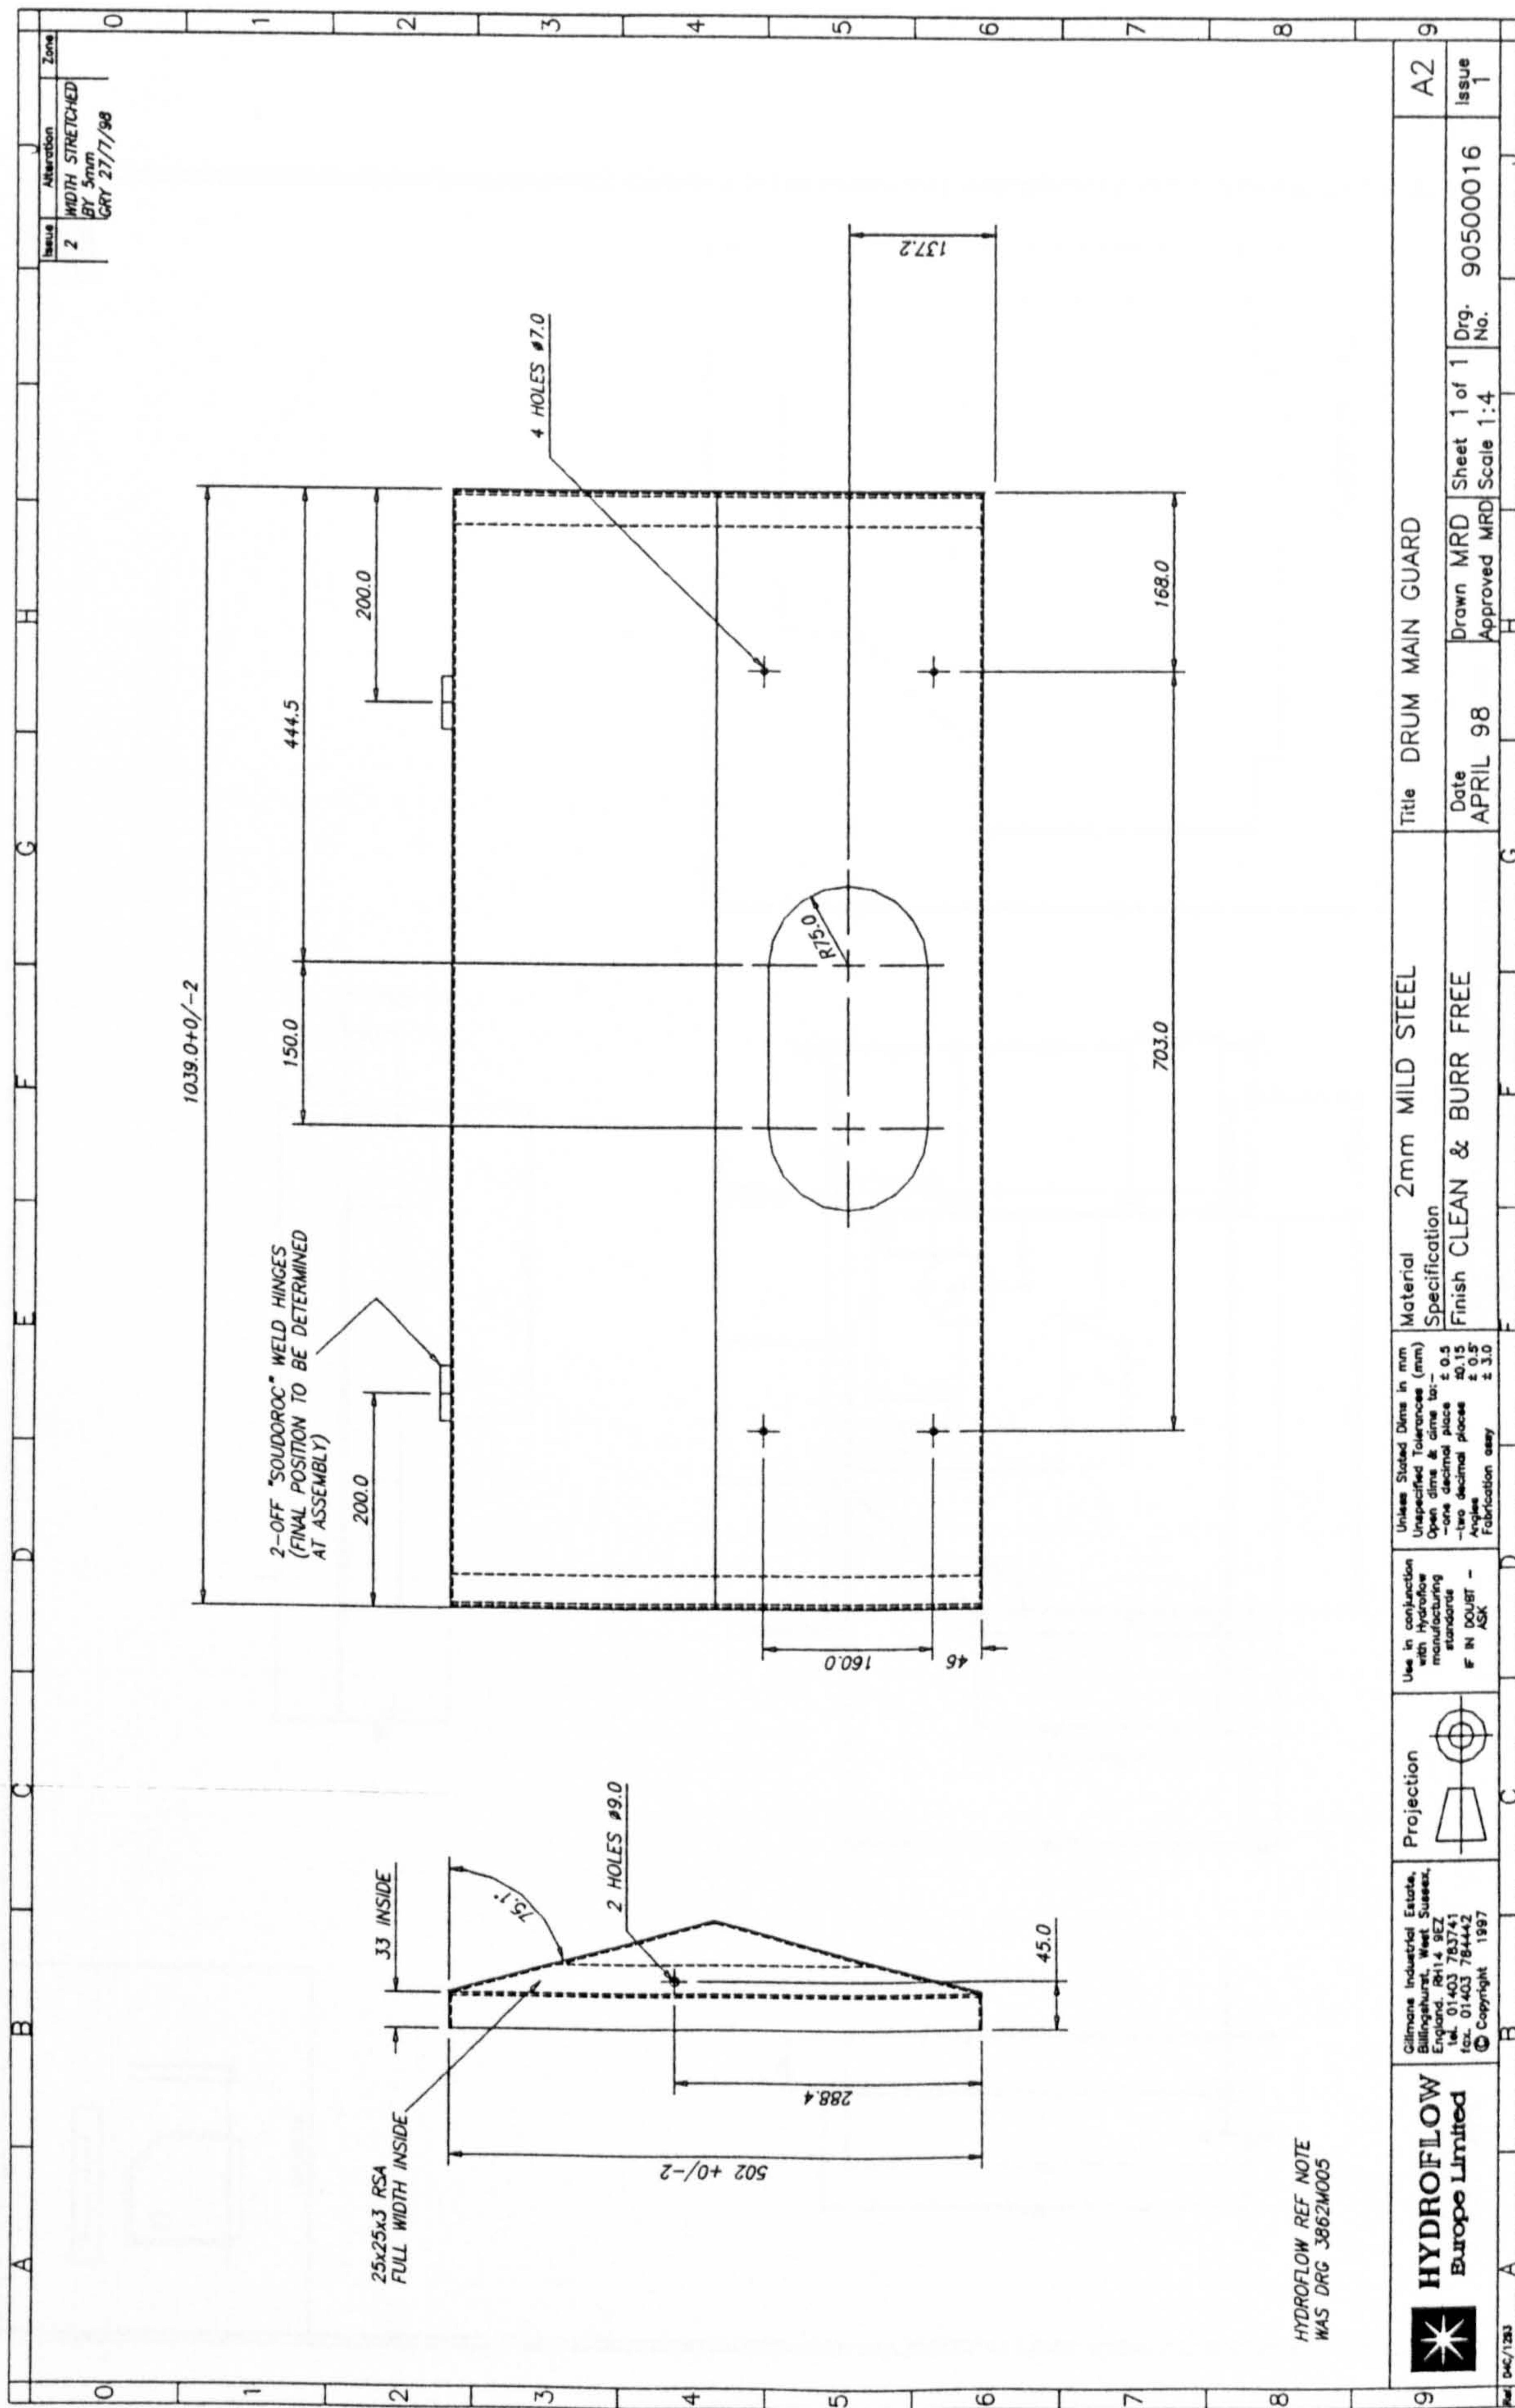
Hydroflow Drum Main Guard– Example Manufacturing Drawing
